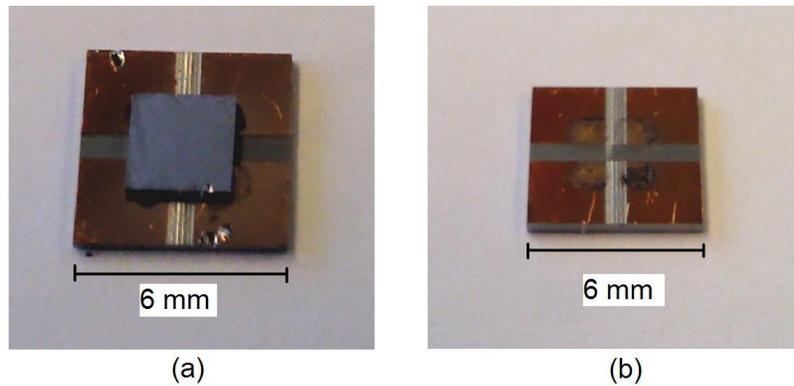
Bonded dies used for contact resistance measurements: (a) before shear test; (b) after shear test.
